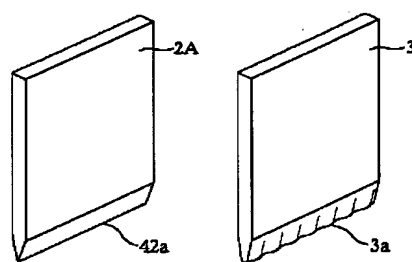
It is a perspective view showing the synthetic resin case of this Embodiment 4.
